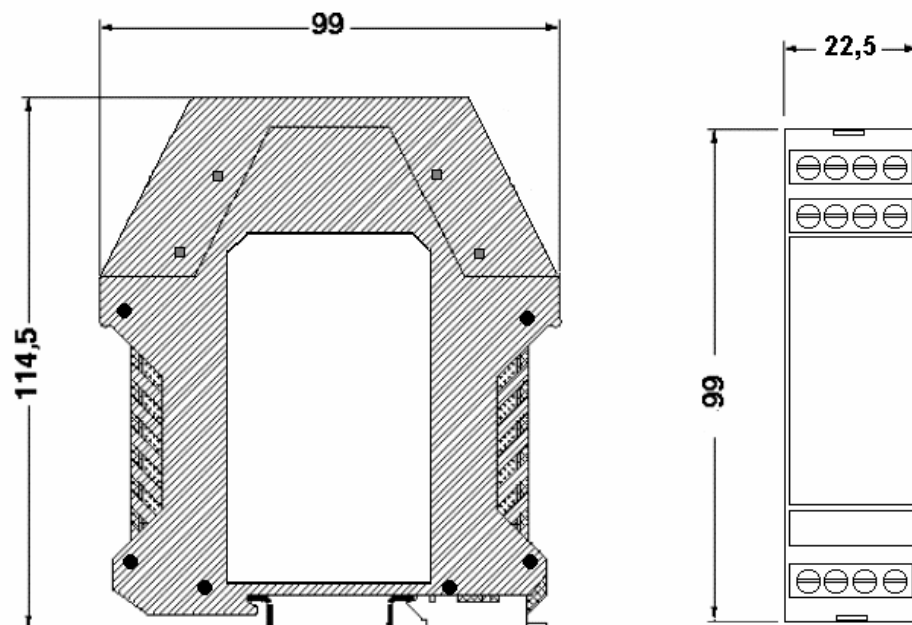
mechanical dimensions of the safety module NA1/3-C-T (front and side view); all dimensions are in mm.
